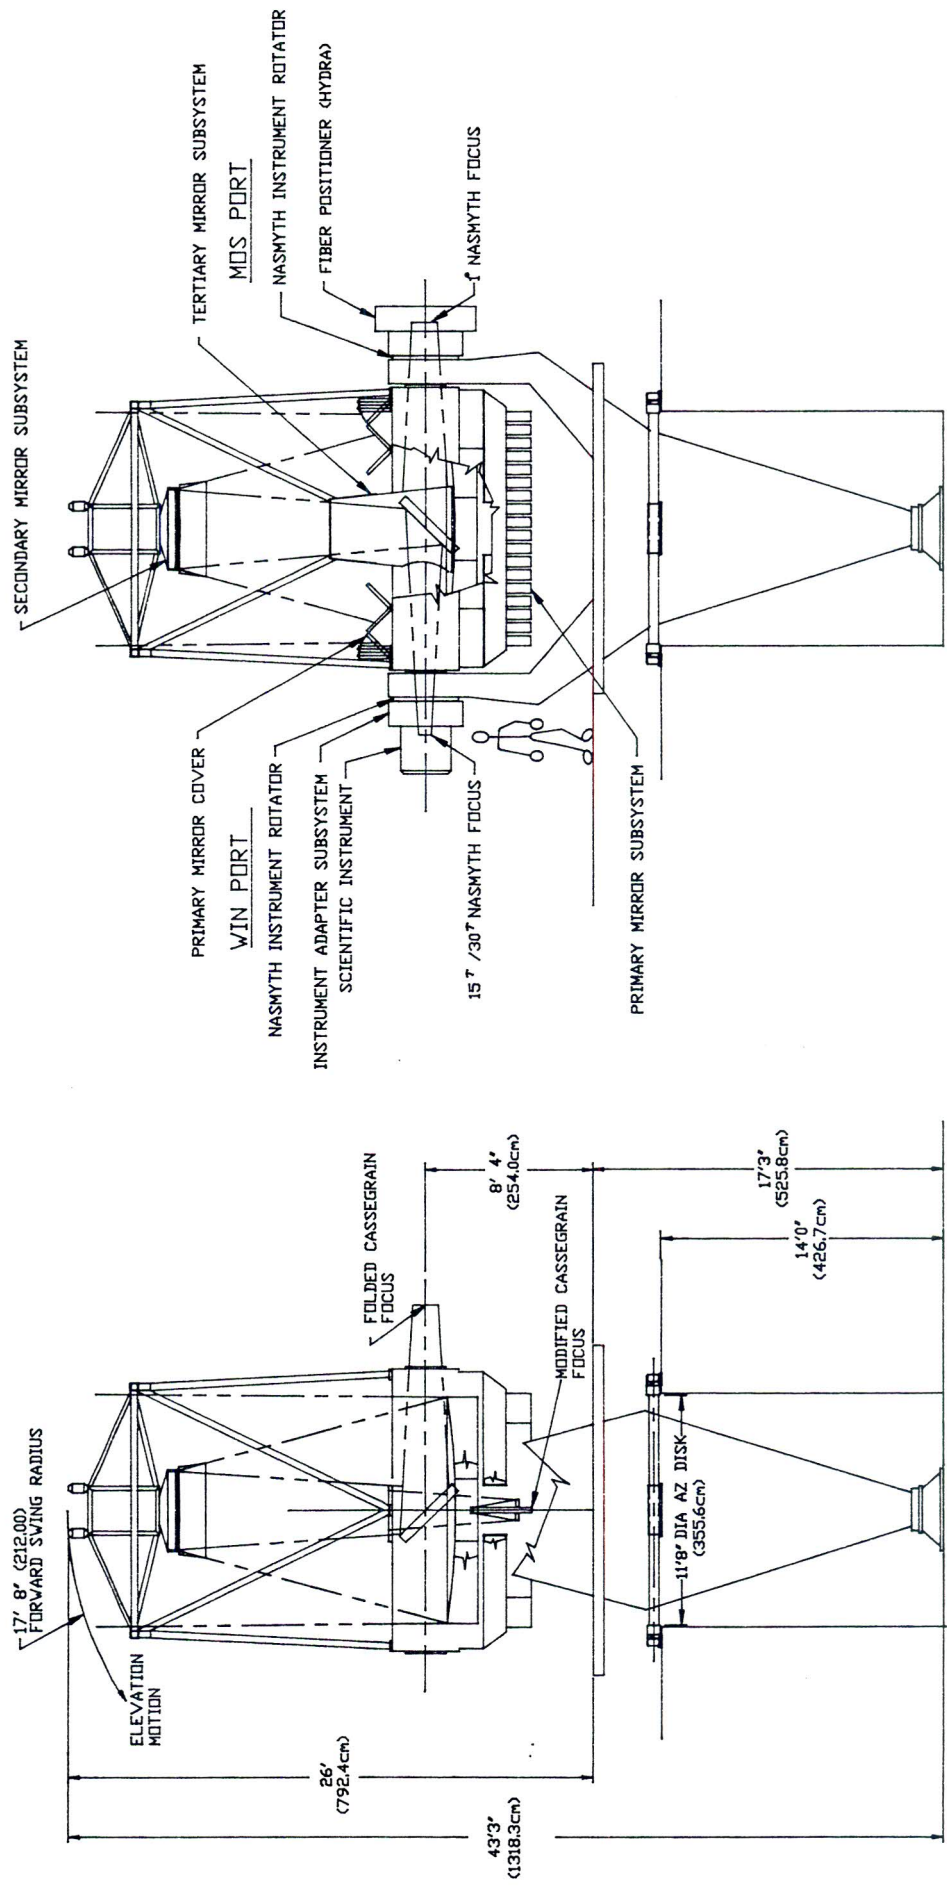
PLAN OF WIYN 3.5 METER TELESCOPE
